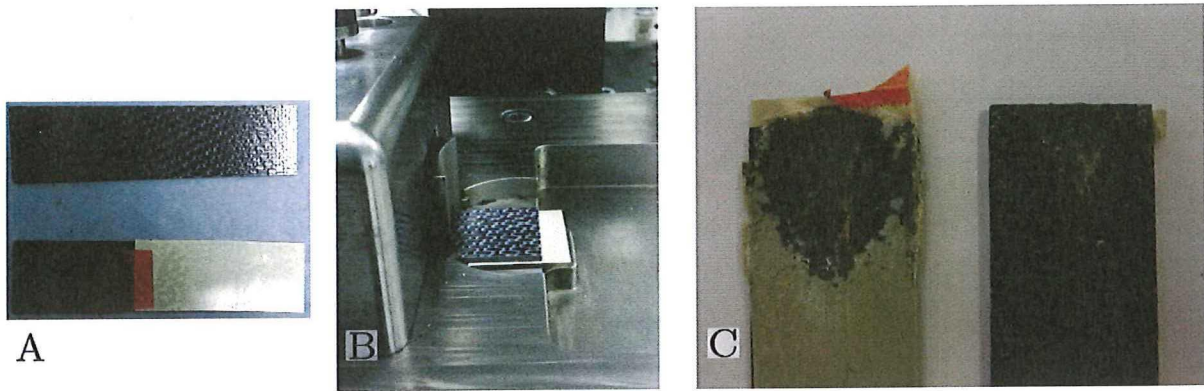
| Experiment for zero travel energy controlled welding of a larger overlap with, A) the large ED placement, B) the welding setup and C) the fracture surfaces, showing sample #19 (appendix B)
